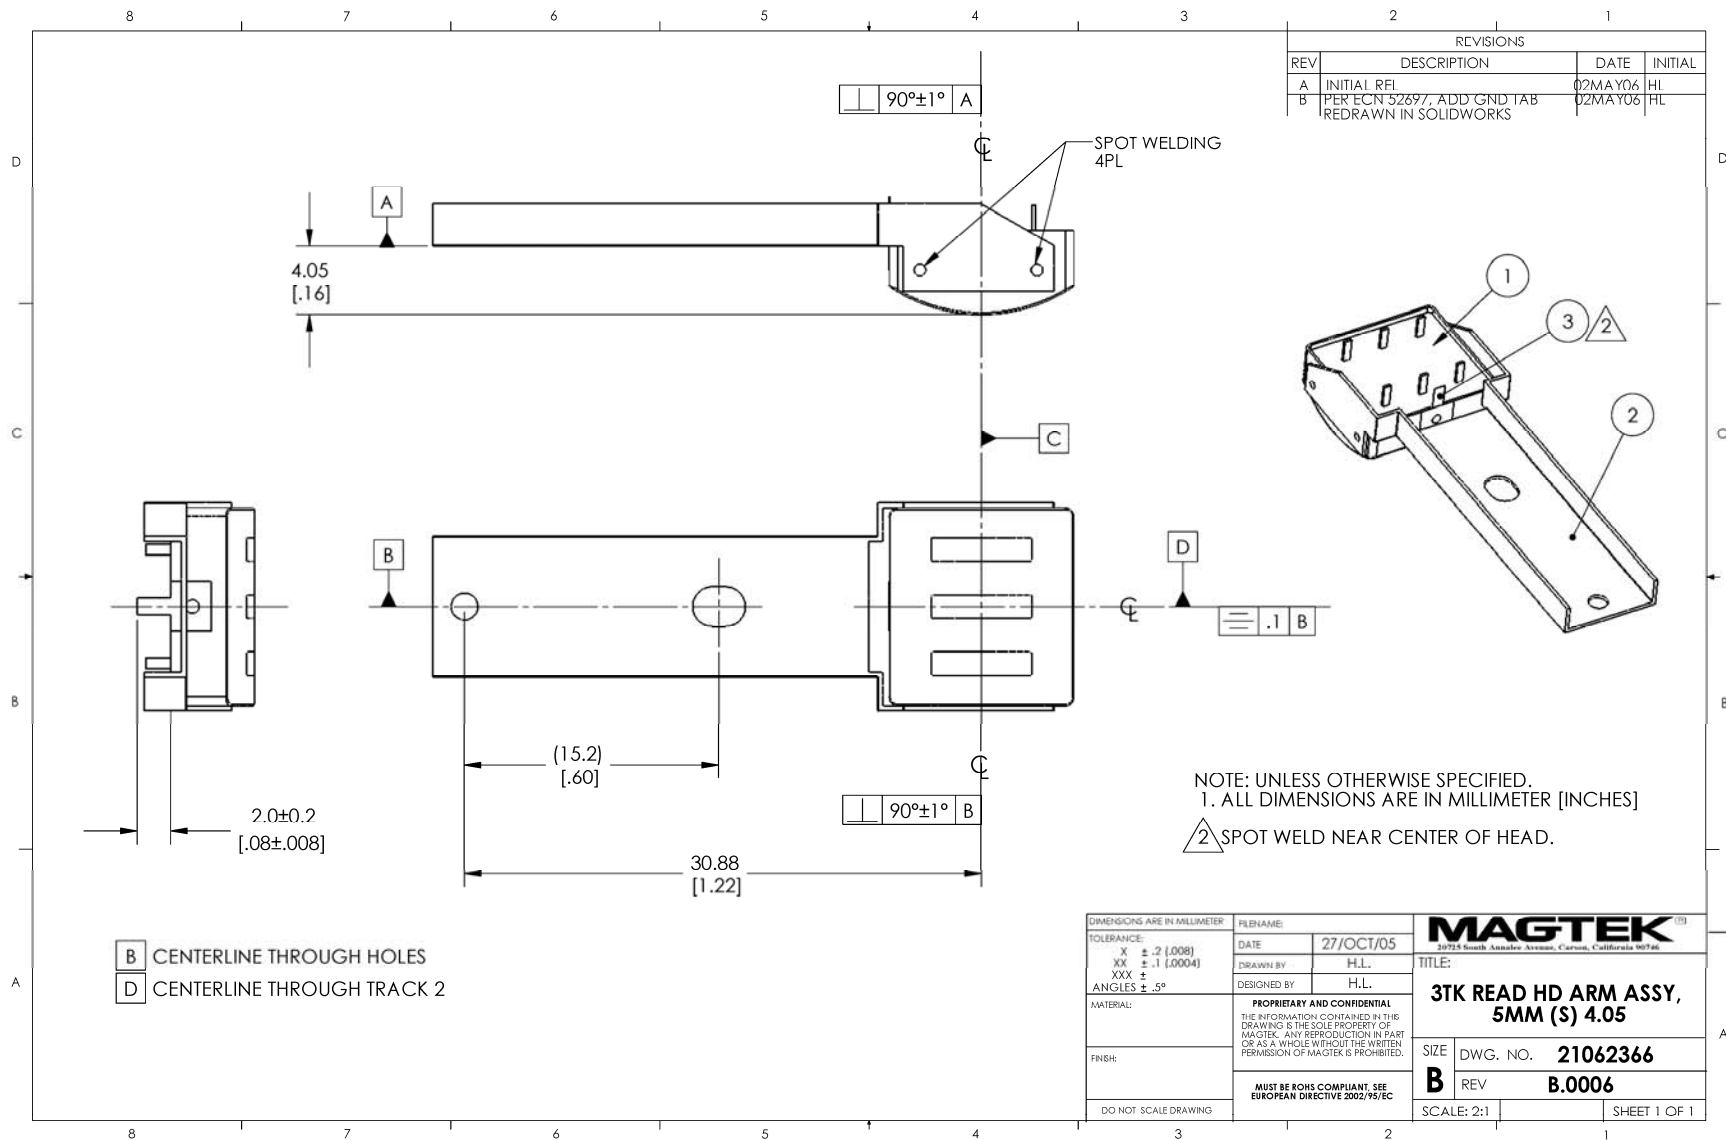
3-Track Read Head on Low Profile Beam Arm
